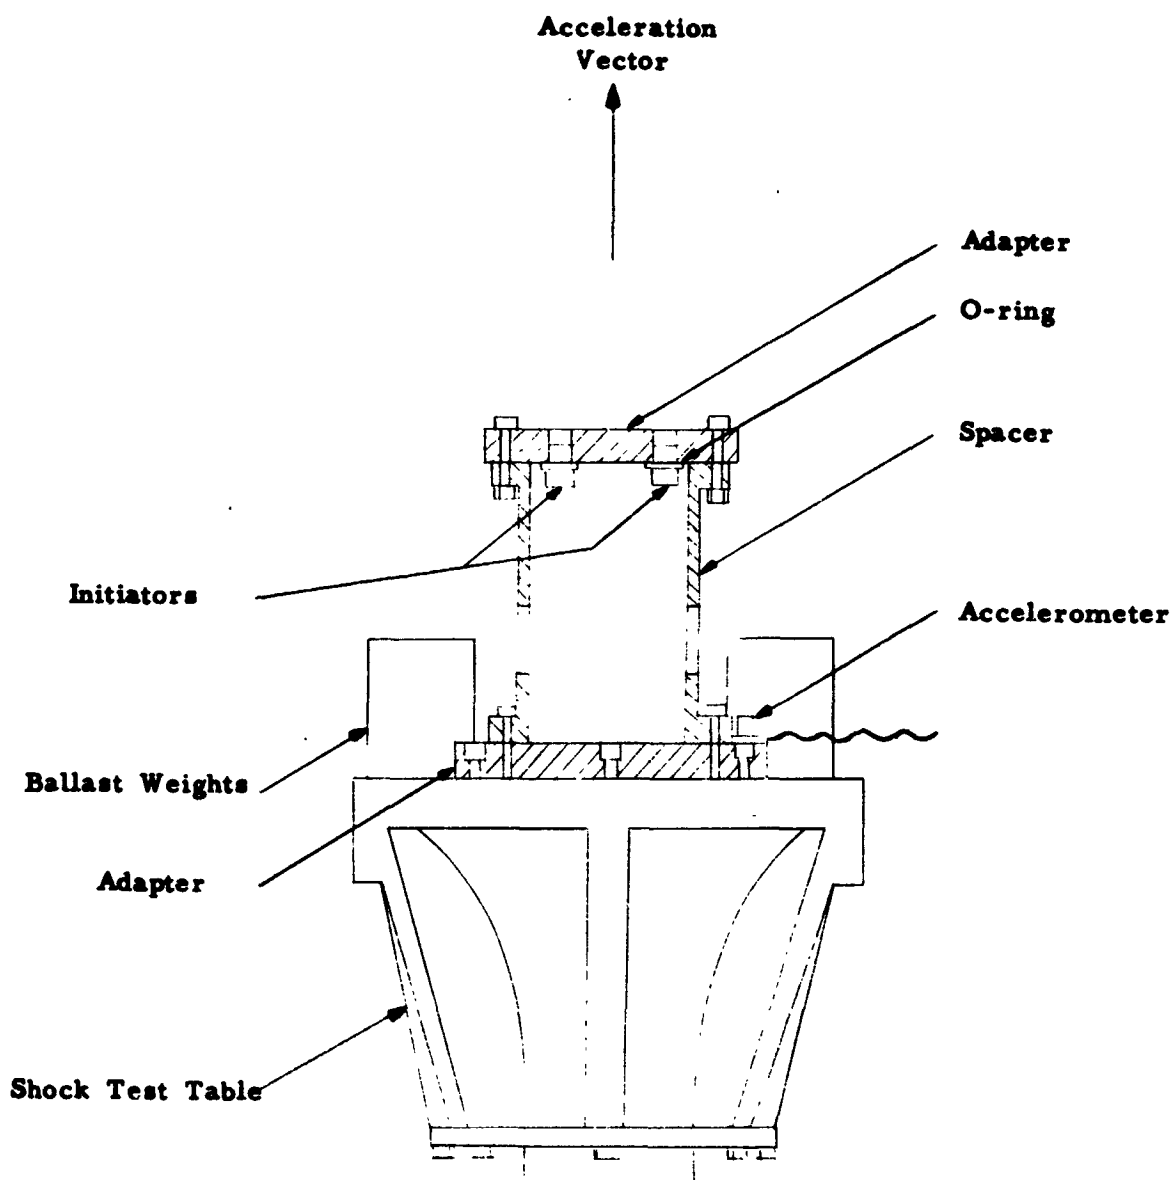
Assembly for TX346 and TX346-1 Initiator Shock Tests
